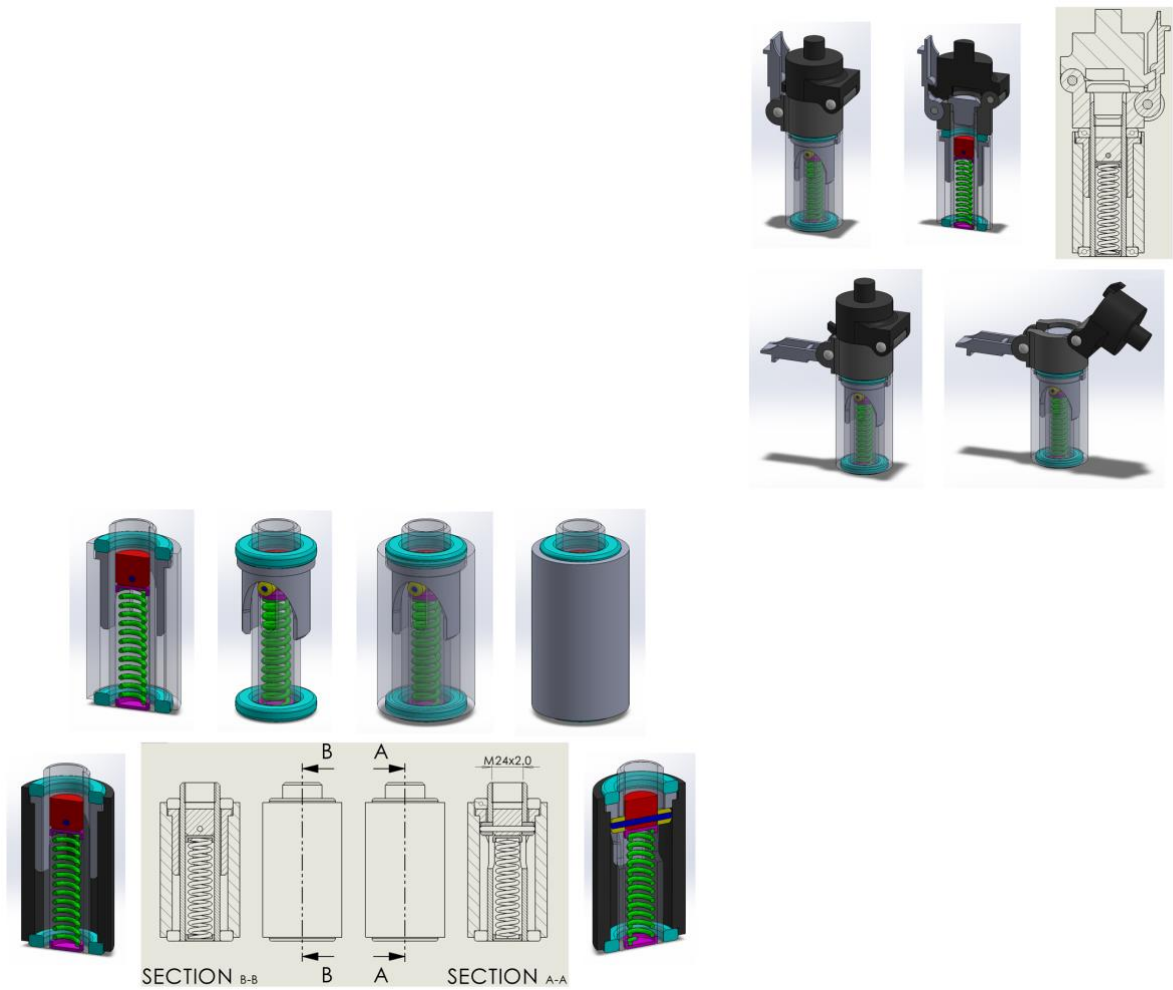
, 22: Stabilizer 3D Section Views and Opened Hinge Configuration
